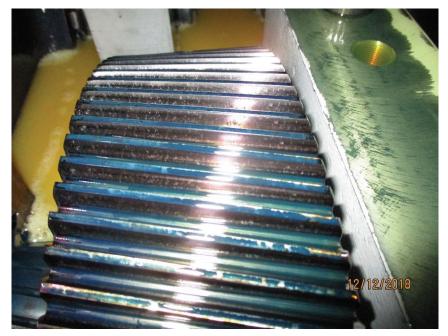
South Span Drive Reducer. The reducer gear teeth have minor damage that may be from particles passing through the mesh.
